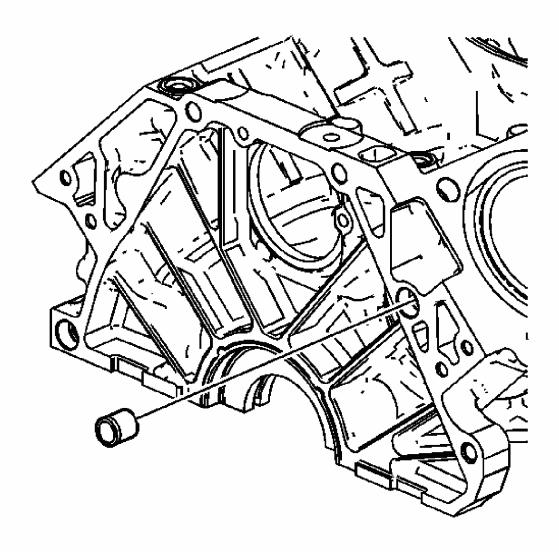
View Of Transaxle Locating Dowels Courtesy of GENERAL MOTORS CORP.
